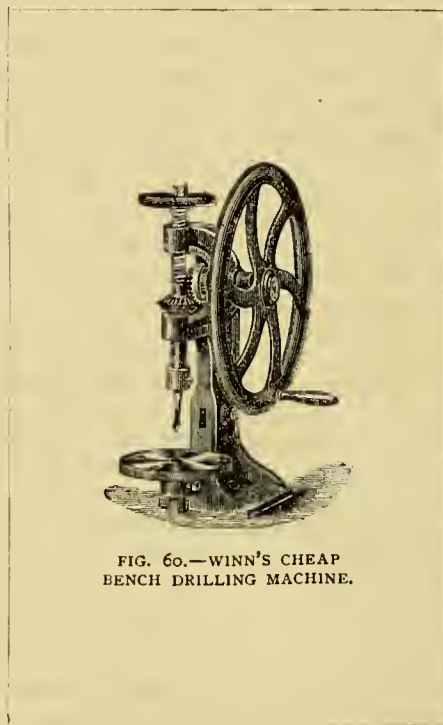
WINN'S CHEAP BENCH DRILLING MACHINE.
